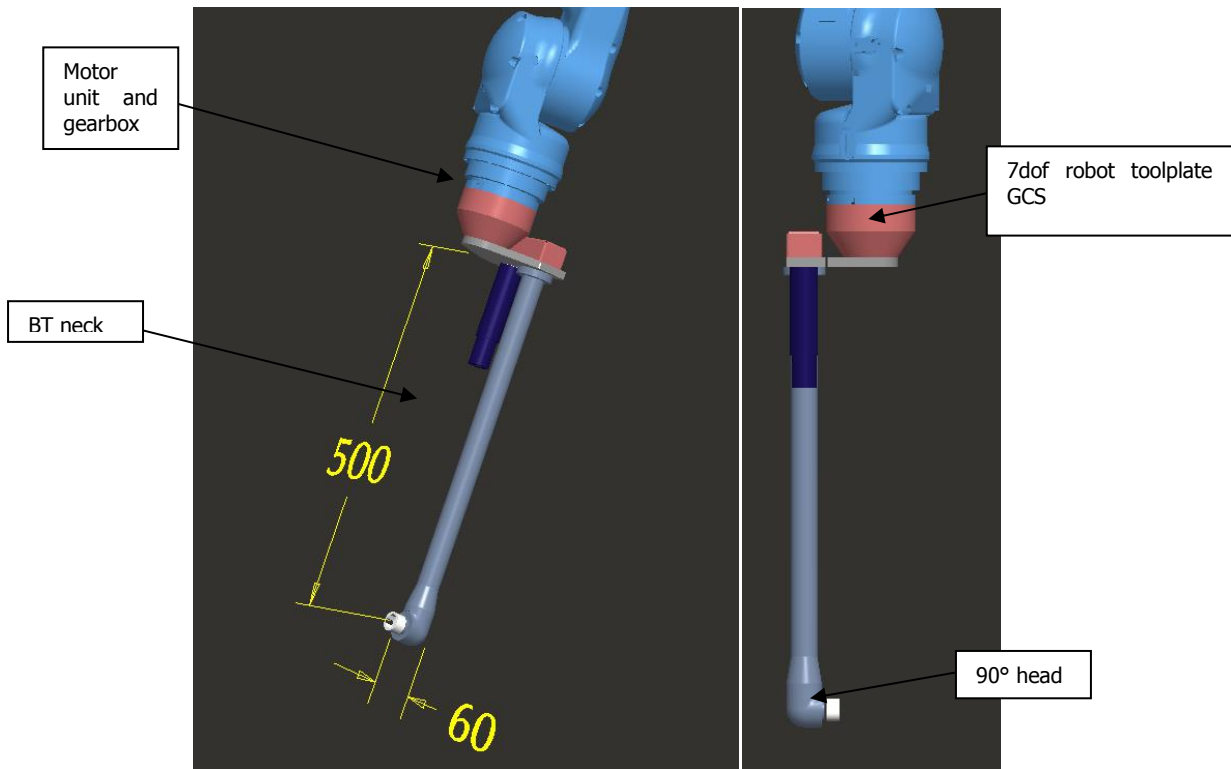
Bolting tool dimensions and overall configuration on robot wrist
